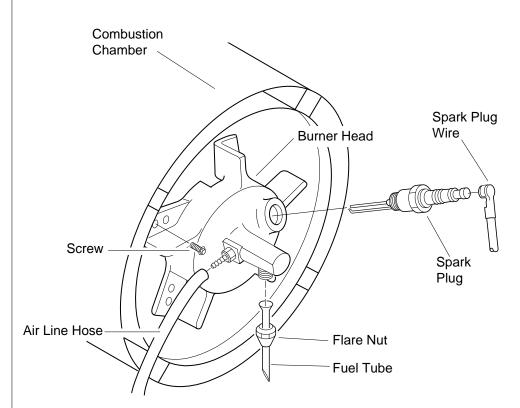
Removing Burner Head, 150,000 BTU/Hr Model
